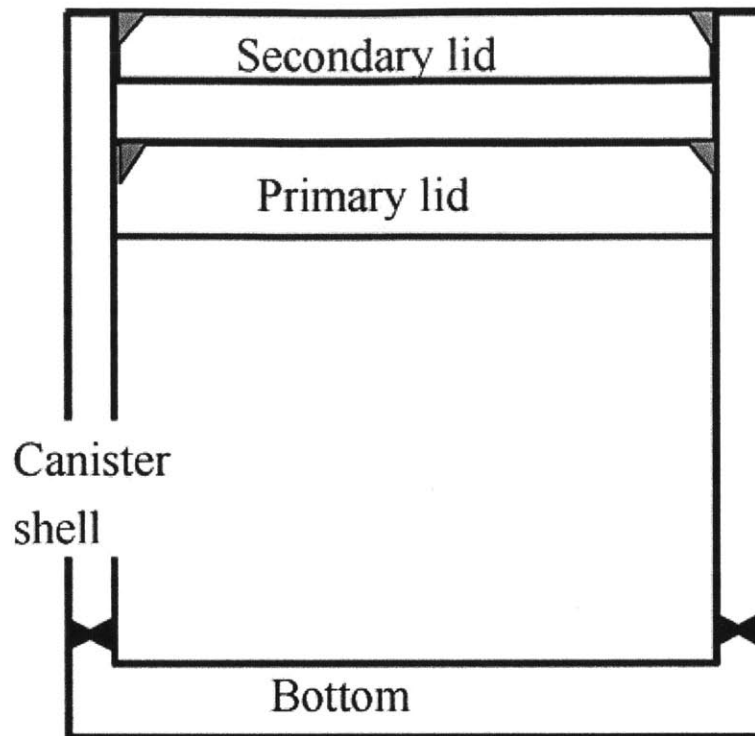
Used fuel canister with redundant lid welds and full penetration canister shell welds [Saegusa et al., 2008].
